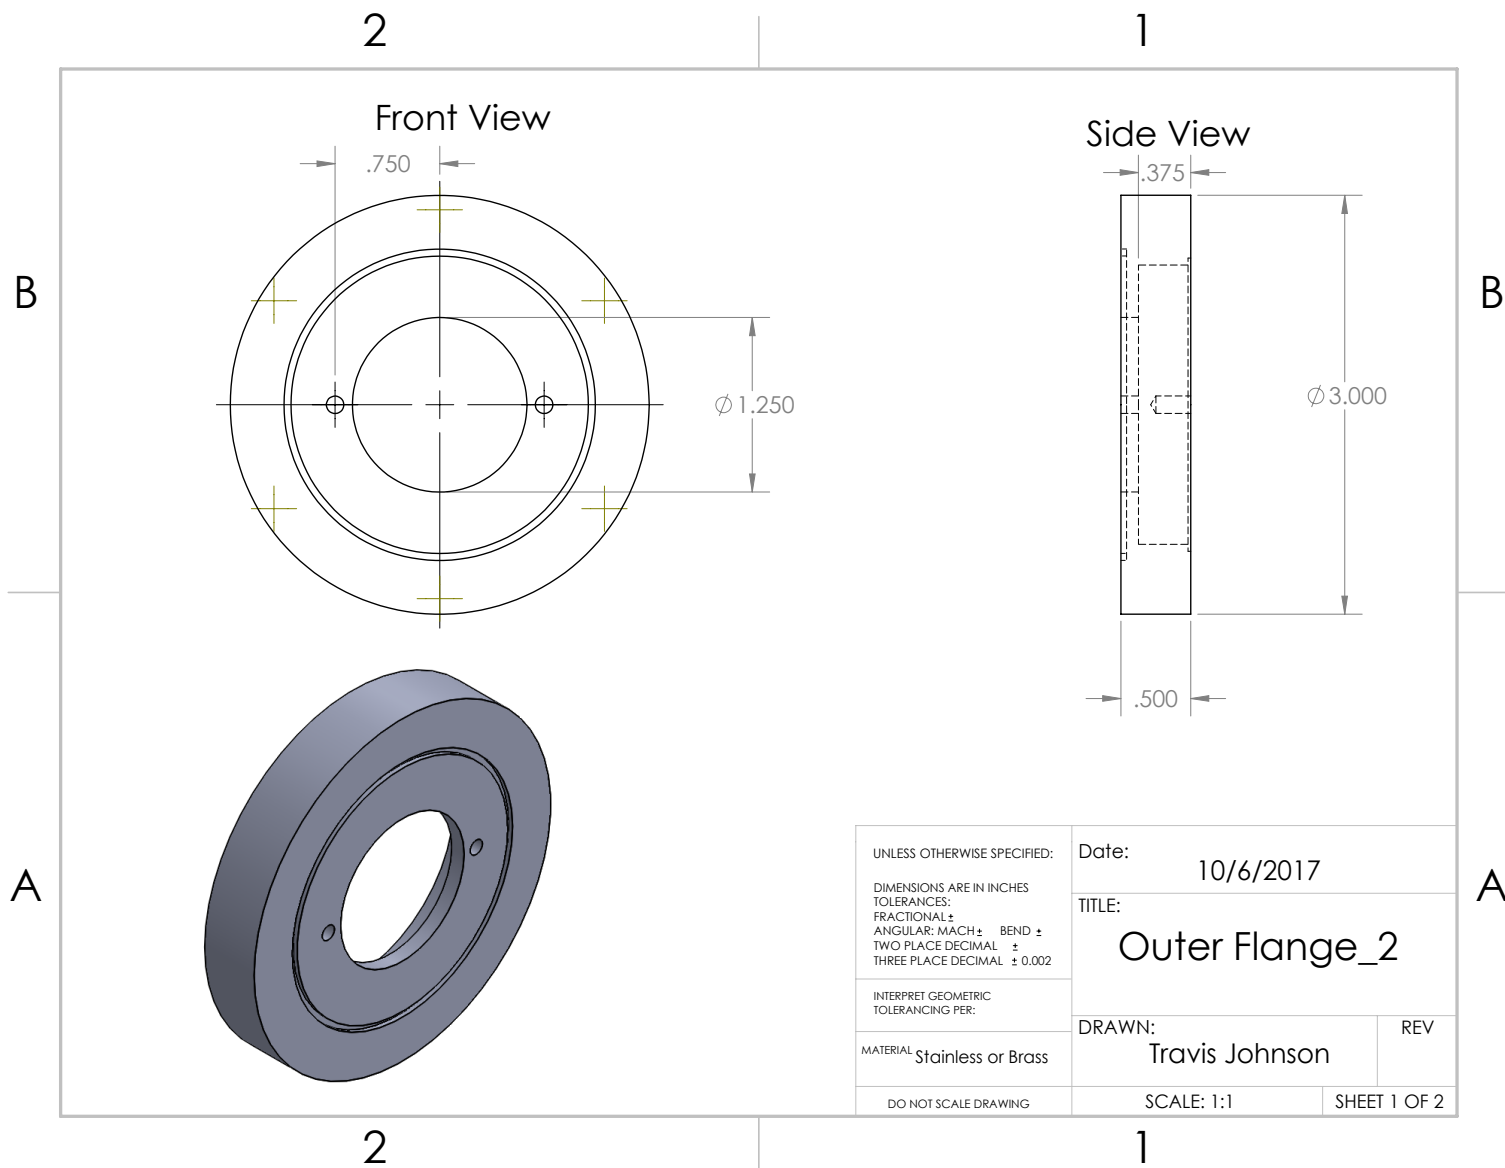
Page 1 detailing the second piece of the three piece flange. Image taken from SolidWorks®.
